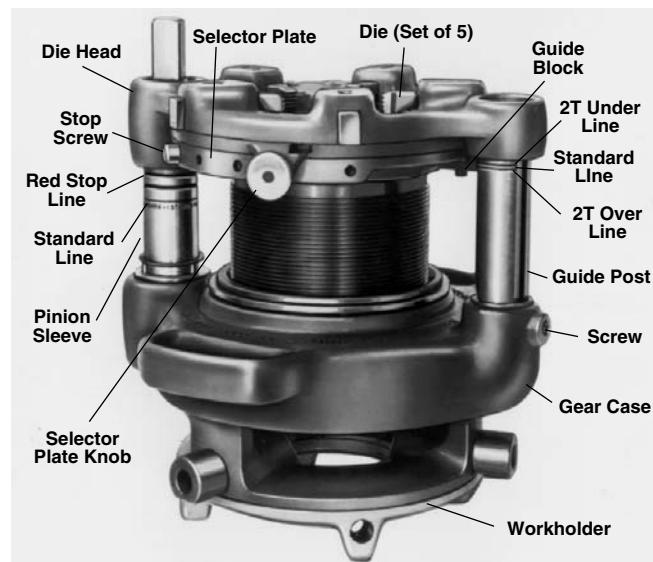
No. 141 Geared Threader Showing Pinion Sleeve And Guide Post Reference Lines (No. 161 Geared Threader Similar)
